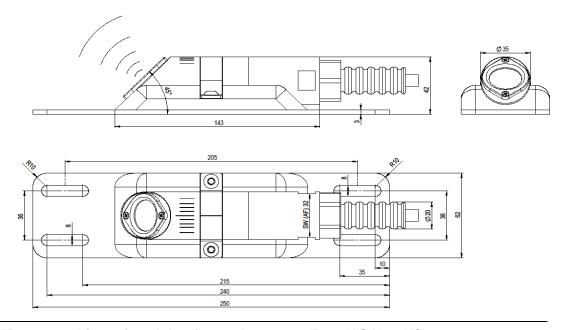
Dimensioned drawing wedge sensor Type NIS-V280KS
